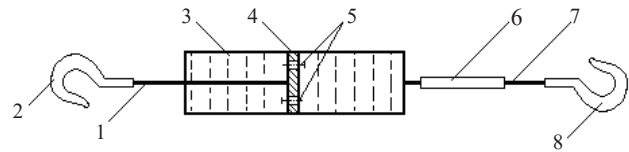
Device for fastening a wagon relative to the deck of a railroad ferry: 1 – rod; 2 – hook to fasten the body; 3 – body; 4 – piston; 5 – throttle openings; 6 – adapter with thread cutting; 7 – rigid rod; 8 – hook for fastening using a deck ring
